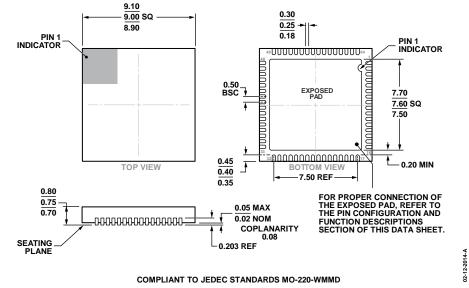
64-Lead Lead Frame Chip Scale Package [LFCSP\_WQ] 9 mm × 9 mm Body, Very Thin Quad (CP-64-15) Dimensions shown in millimeters
